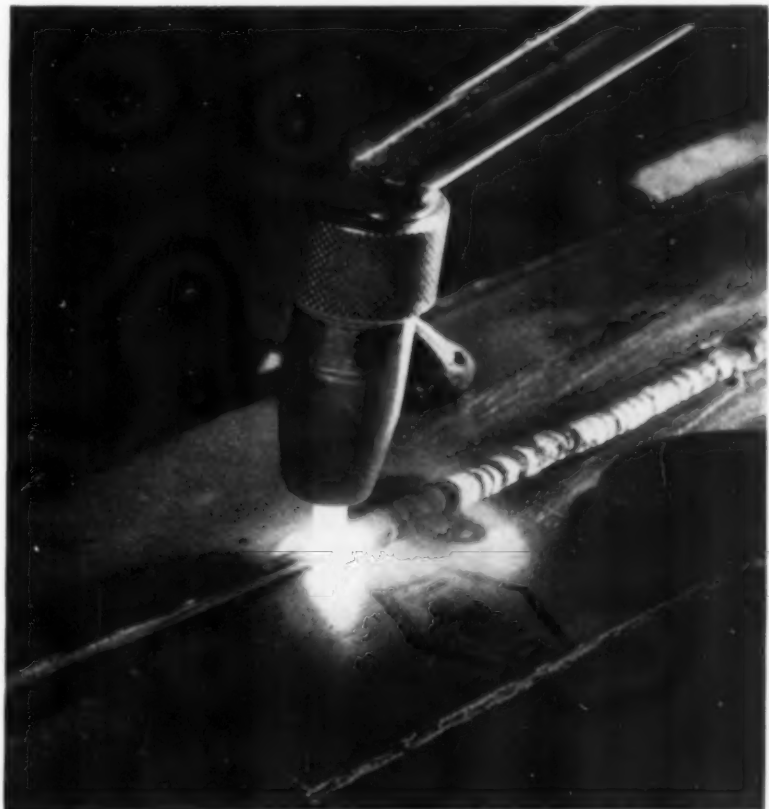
Welding Magnesium by the "Heliarc" Welding Process. A platinum electrode contained within the welding head directs a stream of white hot, inert helium gas onto the joint; the welding rod is fed in from the left, producing a very uniform bead. Courtesy Linde Air Products Co.
